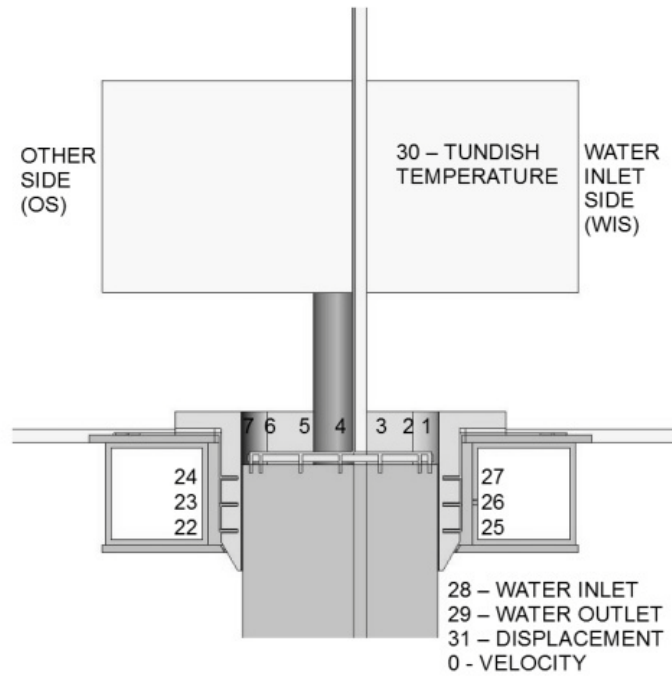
Cross section showing placement of the six mould thermocouples.
